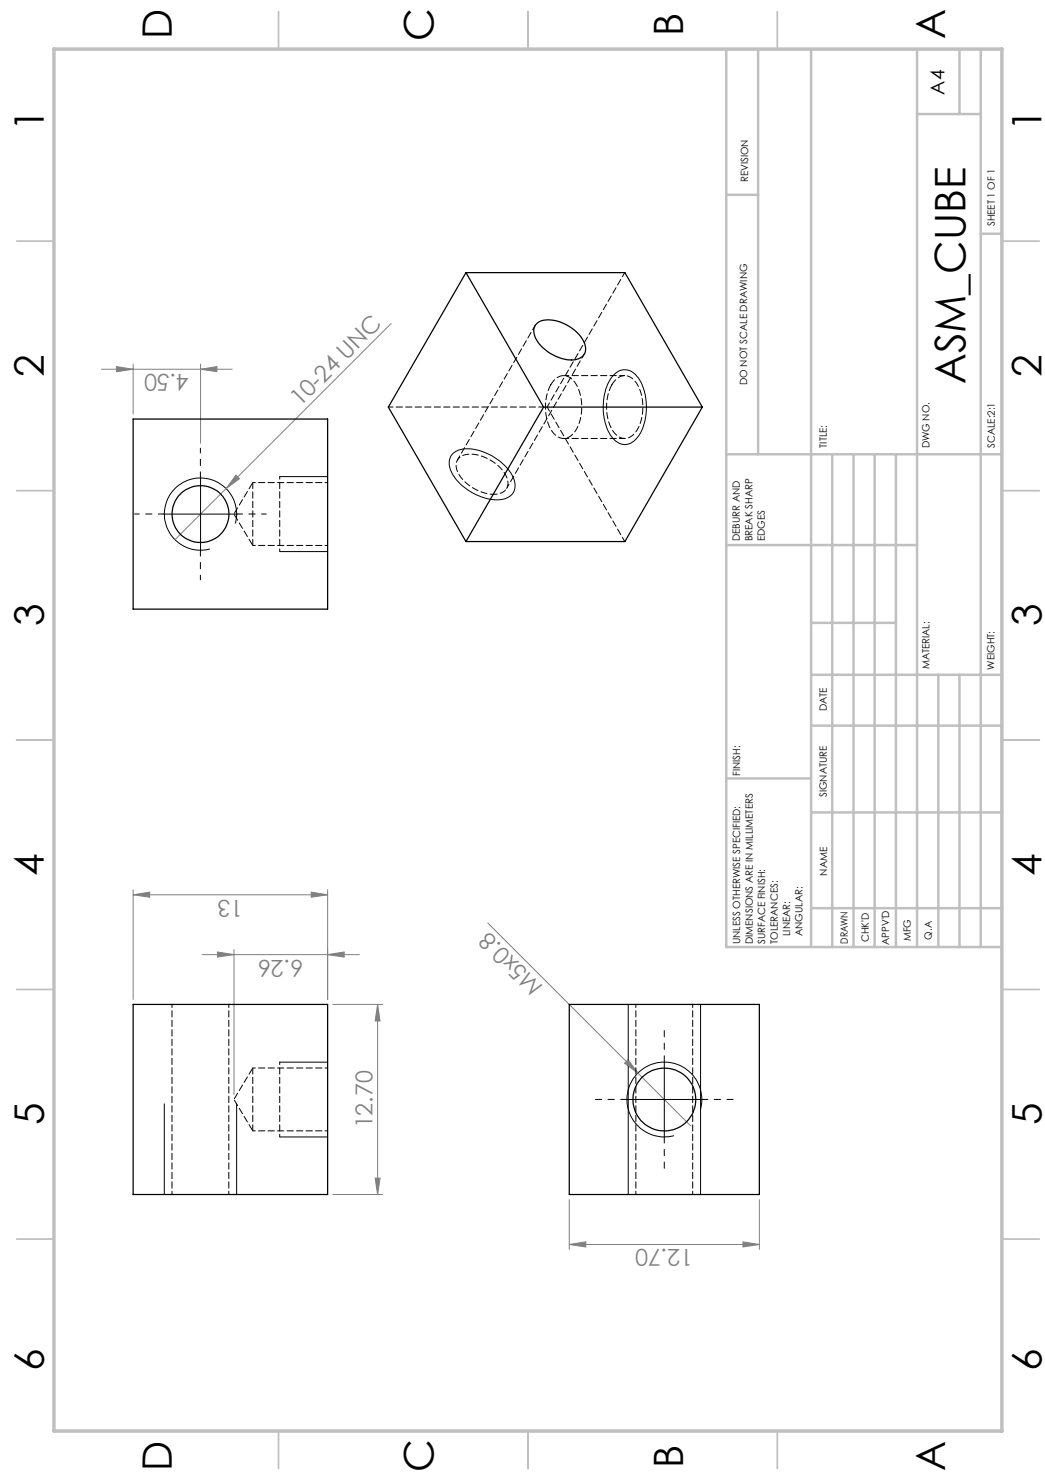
Part1 drawing. This part is located as ITEM 7 in the BOM showed in Fig. A.1.
